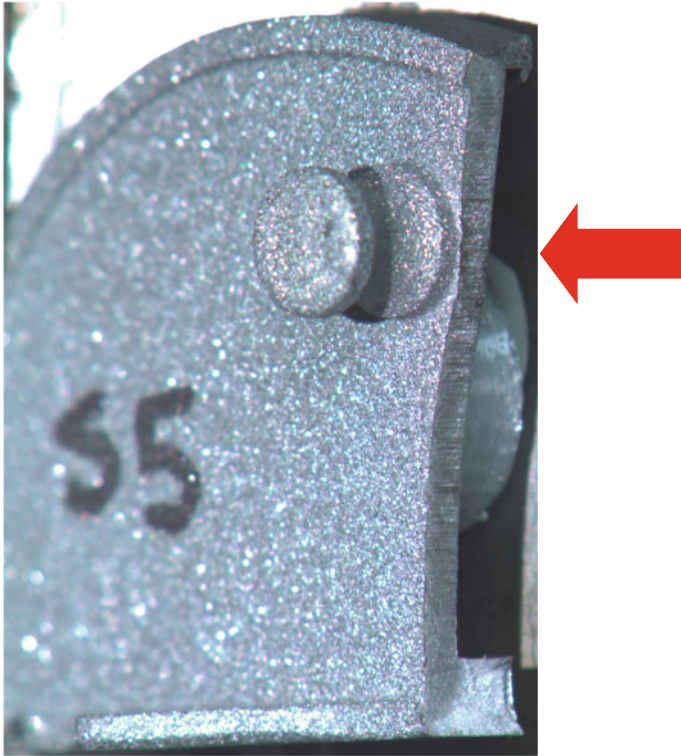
Repicci baseplate fatigue specimen showing complete fracture (initiation region highlighted)
